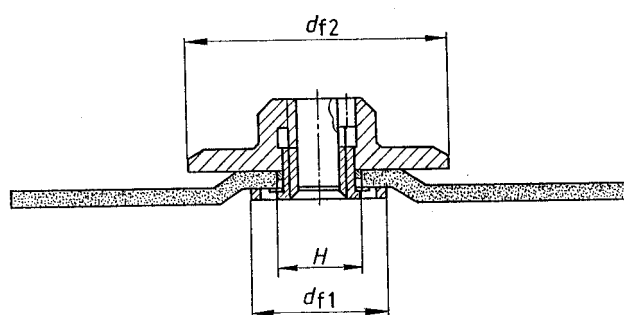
d - Example of flange assembly for reinforced straight cutting-off wheels of type 41
